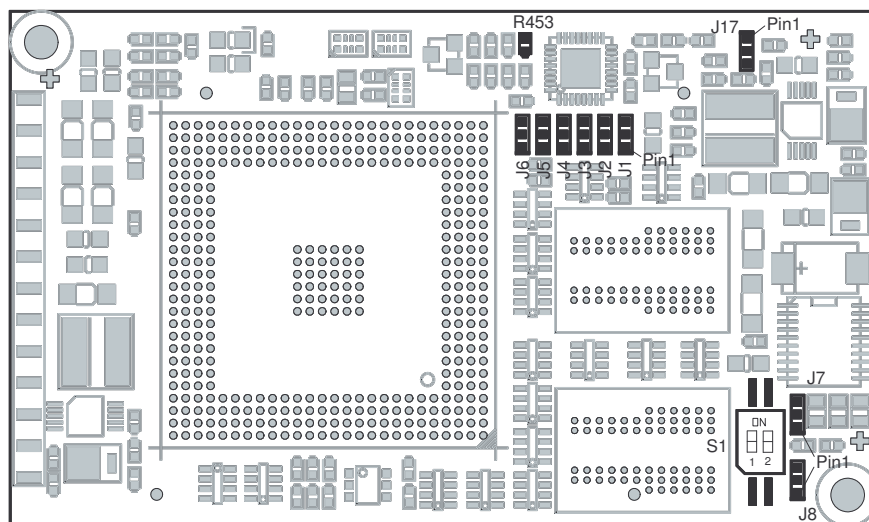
Jumper positions PCB 4244.0 (FPGA)
